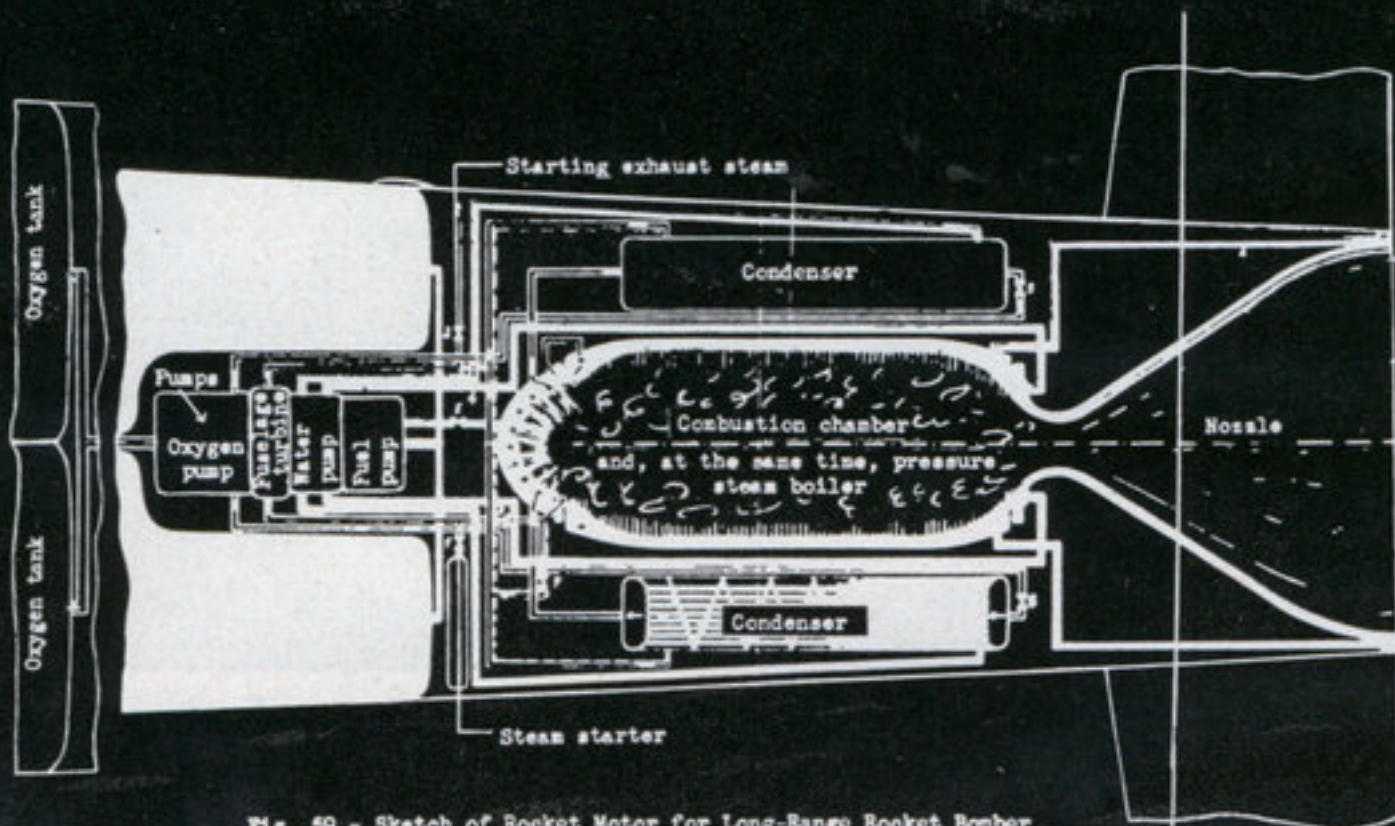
Sketch of Rocket Motor for Long-Range Rocket Bomber
